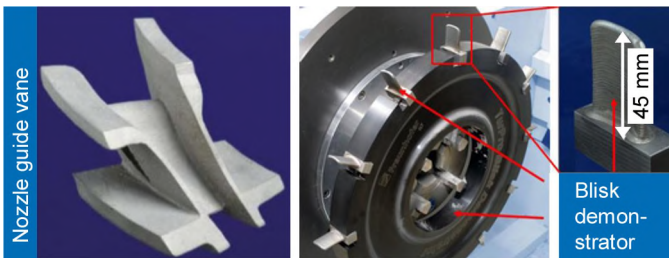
IN718 Nozzle Guide Vane studied for application of High-Power SLM [Courtesy of TurboMecca/136] and blisk demonstrator used for AM machining and cooling strategy development [211].
